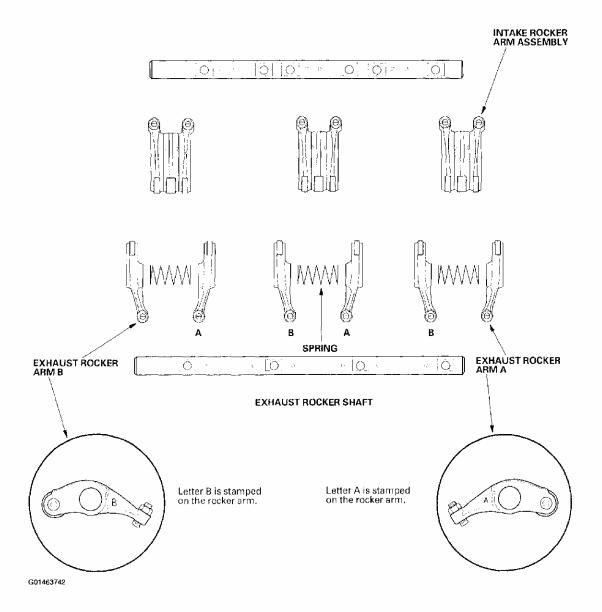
Identifying Rocker Arm & Shaft Assembly Parts Courtesy of AMERICAN HONDA MOTOR CO., INC.
